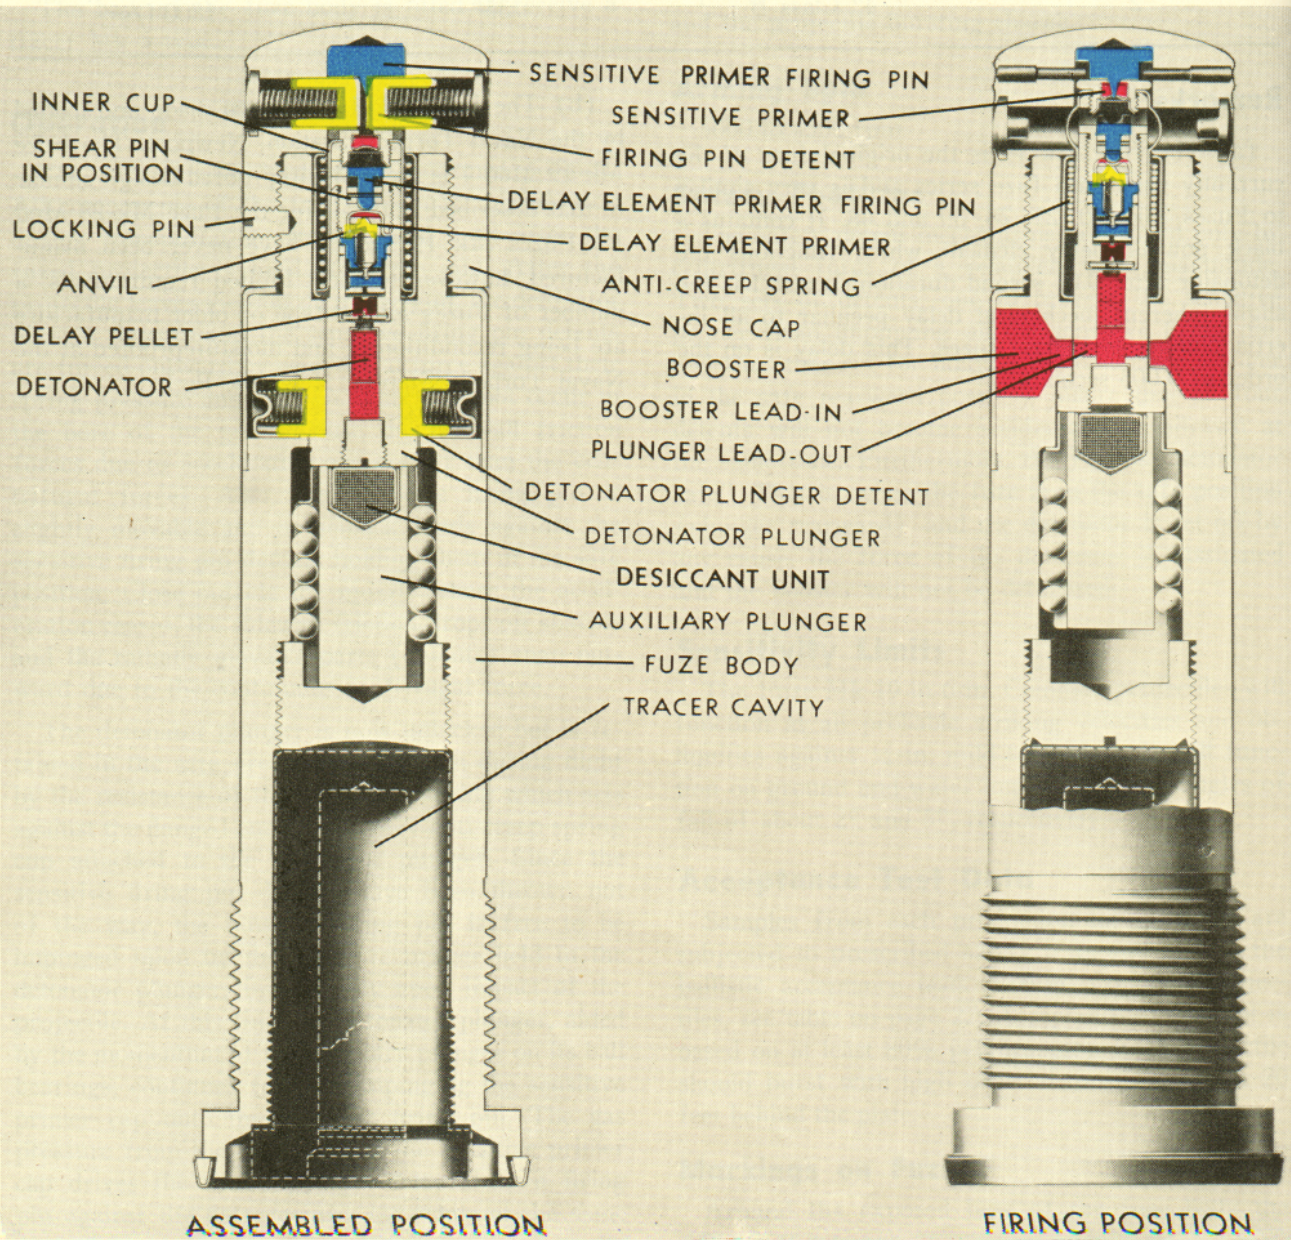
Base Detonating Fuze Mk 20—Sectional View
